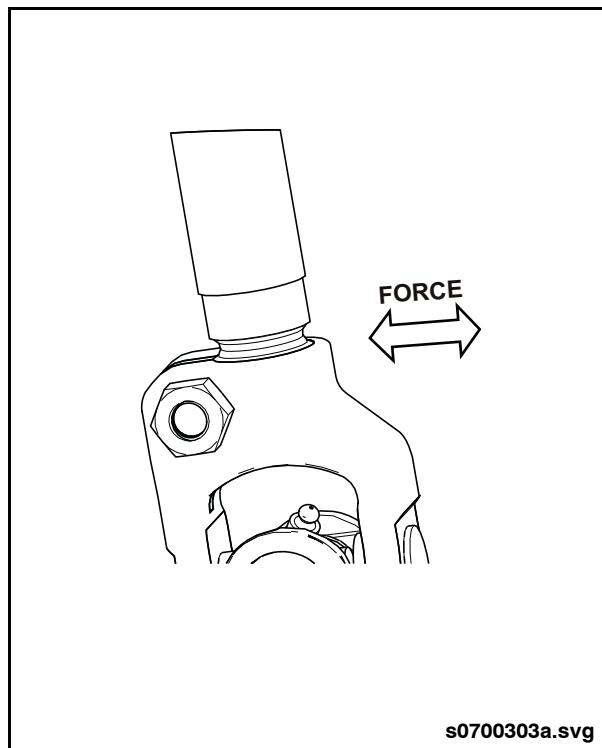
Steering Driveshaft End Yoke Inspection
